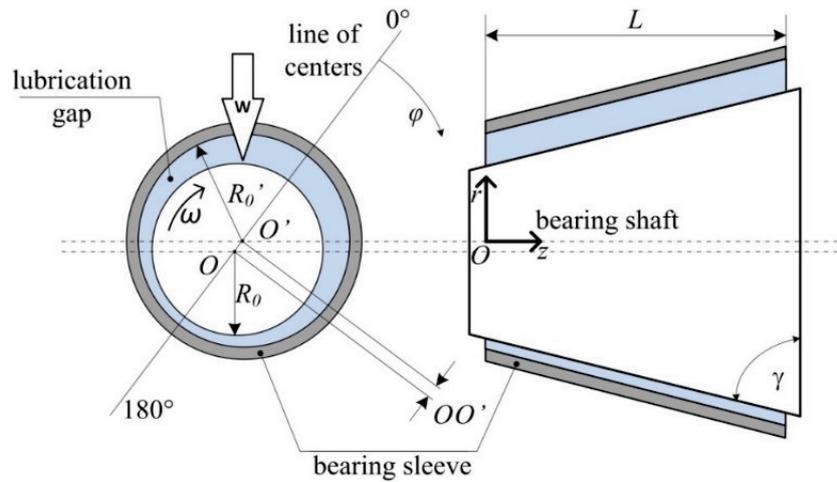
The geometry of concerned slide conical bearing – radial and axial cross-section
